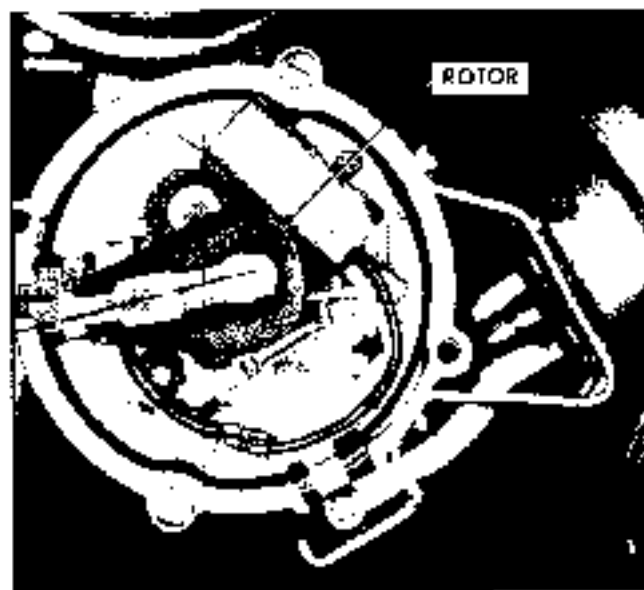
E-28 Rotor in No. 1 Firing Position - 6 Cylinder
